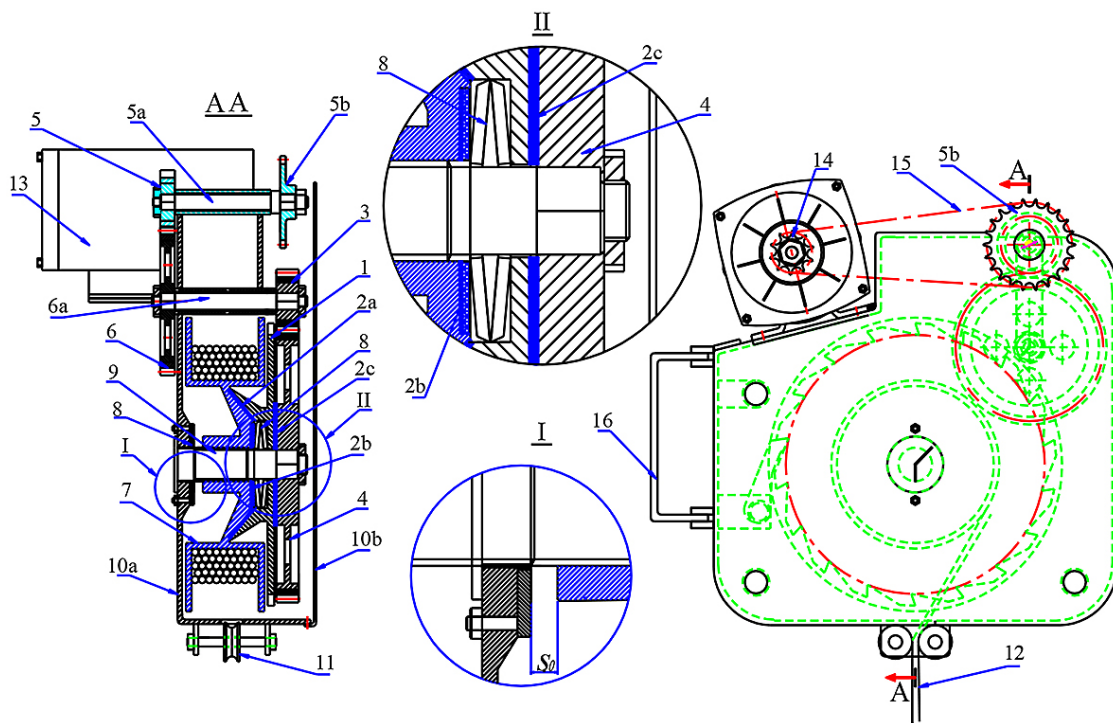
Winches with braking structures to reduce acceleration and shock: 1. Ratchet, (2a, 2b, 2c). Brake friction surface, (3, 4, 5, 6). Transmission gears, 5a. Active shaft, 5b. Passive sprocket, 6a. Medial shaft, 7. Drum, 8. Spring, 9. Screw thread shaft, 10a, 10b. Winch housing, 11. Guiding roller, 12. Cables, 13. Motor, 14. Active sprocket, 15. Transmission unit, 16. Handle
